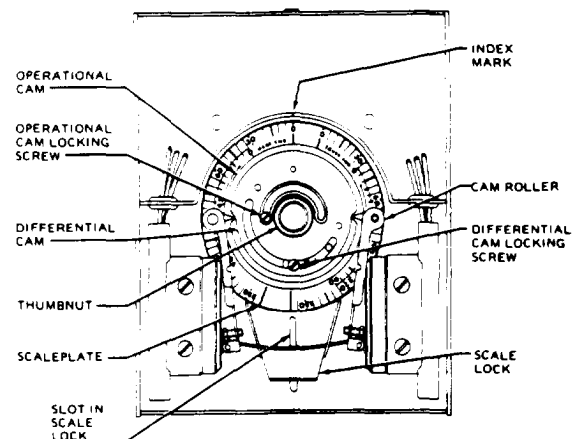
INTERNAL VIEW OF DAMPER MOTOR END SWITCH
